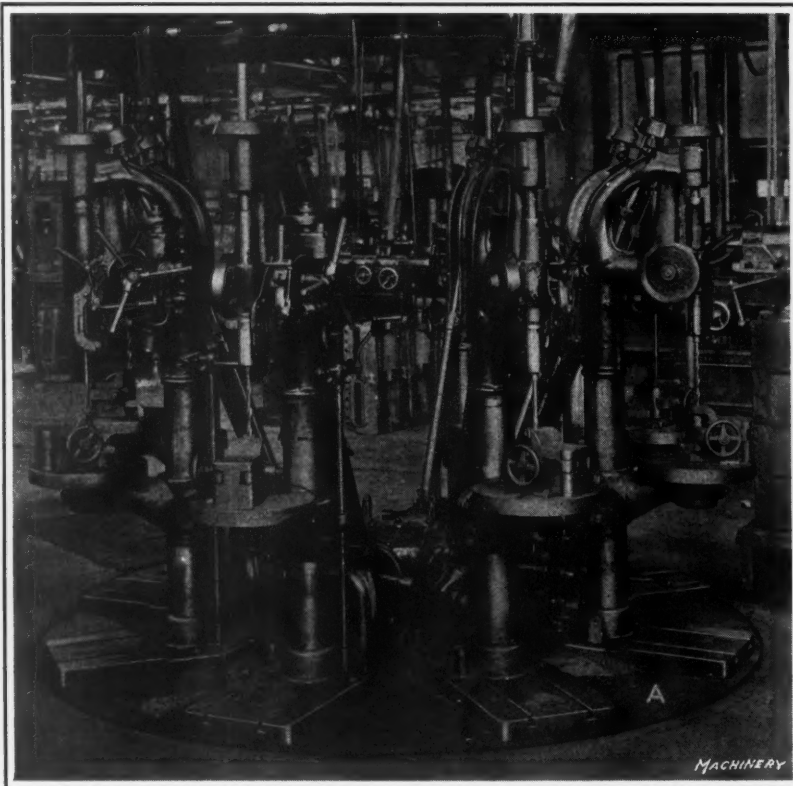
Special Arrangement of a Battery of Drilling Machines equipped for Continuous Operation in drilling and reaming Valve-stem Guides
